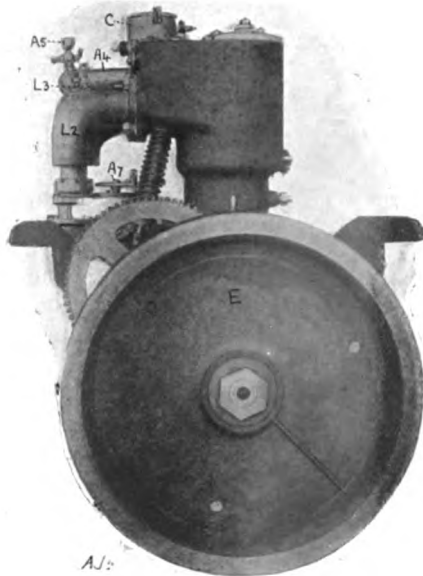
Rear View of the 28-36-h.p. Daimler Engine, showing the inclined valves.
